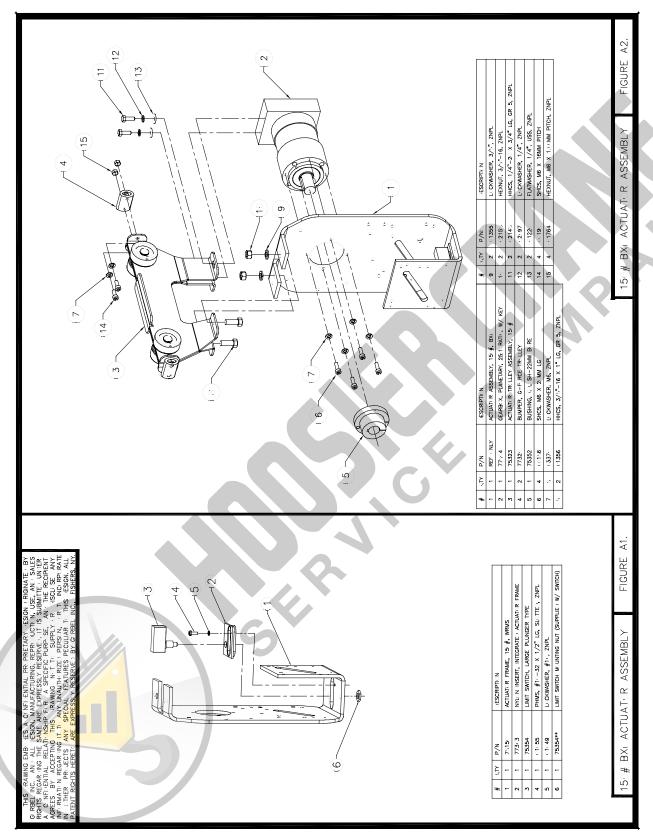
(bottom) & Figure A2 (top). 150# BXi Actuator Assembly.
